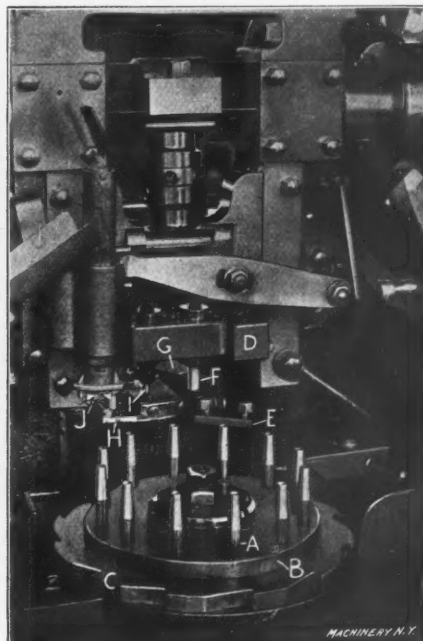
Priming Machine for Inserting the Primer in the Pocket of the Shell
